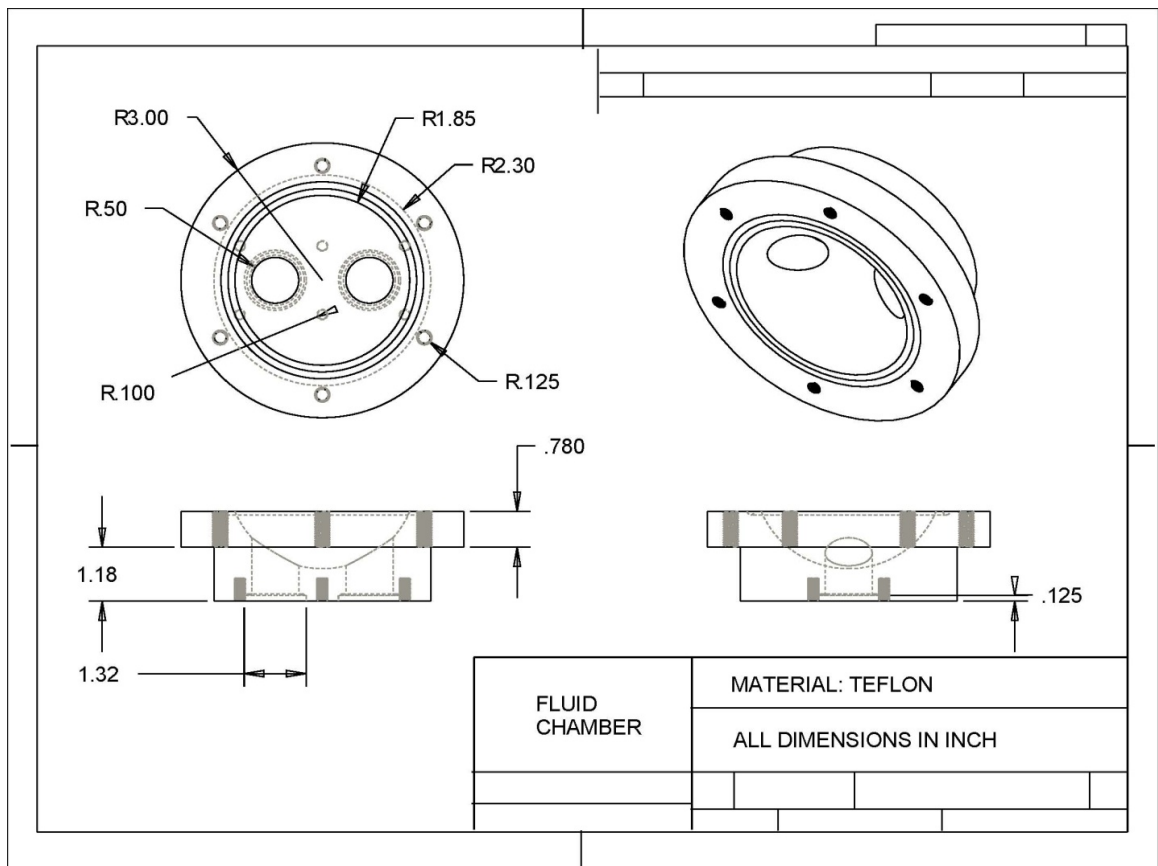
2D CAD model of the testing fluid chamber with detailed dimensions. Figures are presented as the top, front, right hand and isometric views.
